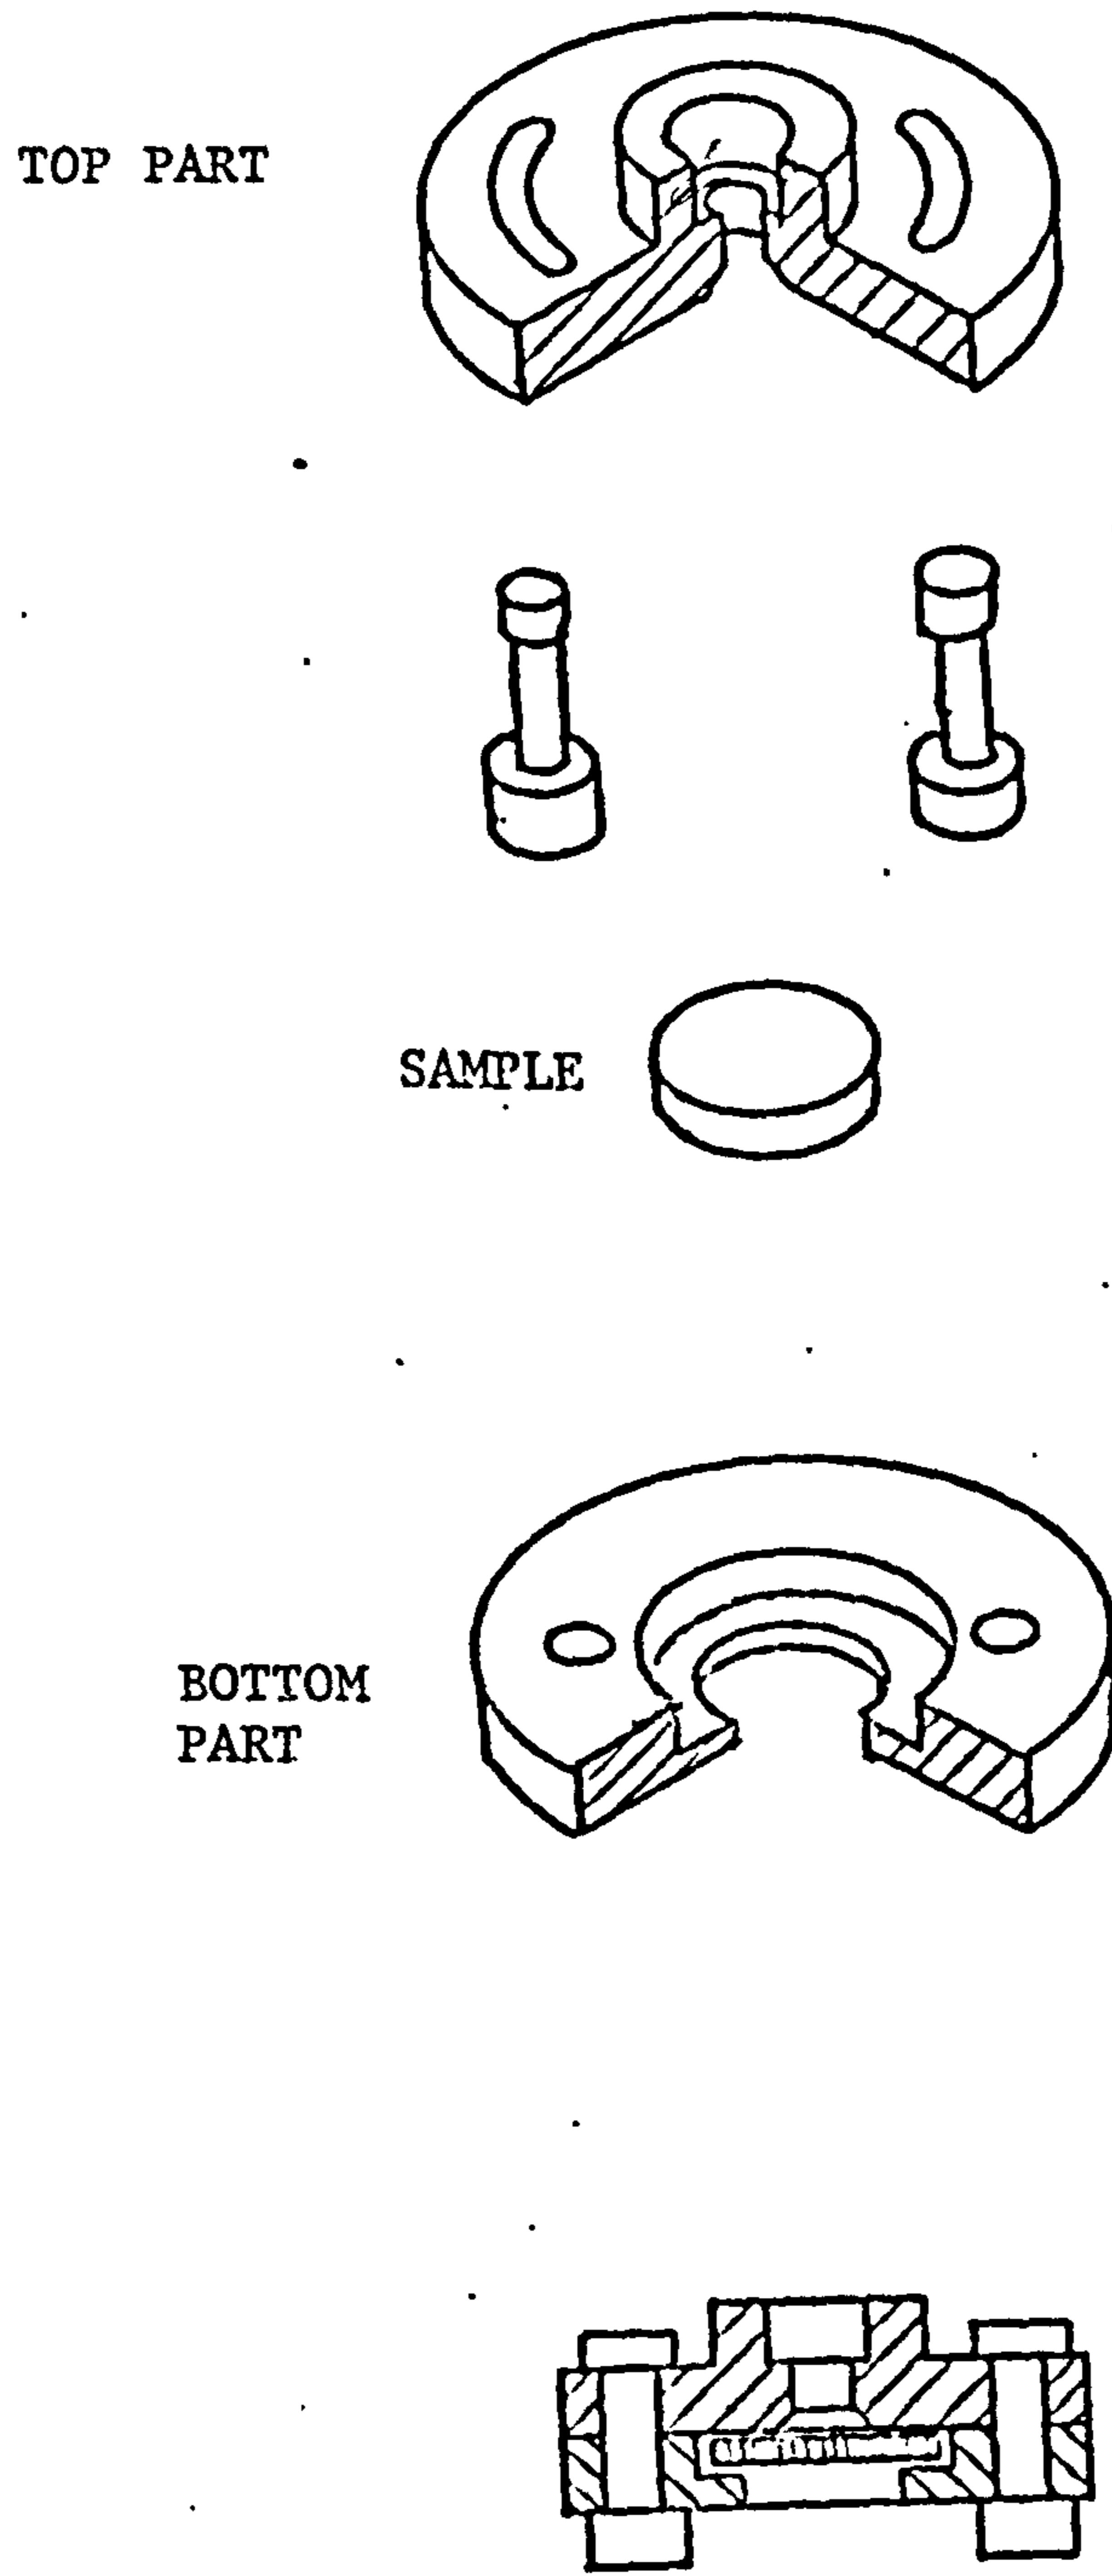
(a) EXPLODED-PICTORIAL AND SECTIONAL VIEWS OF THE SAMPLE HOLDER.
